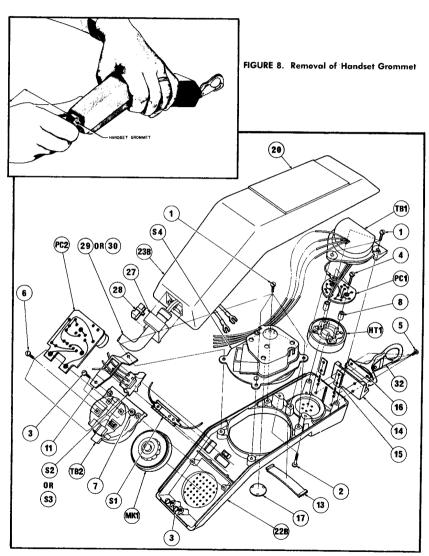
QSE4 Type Handsets—Assembly of Parts
